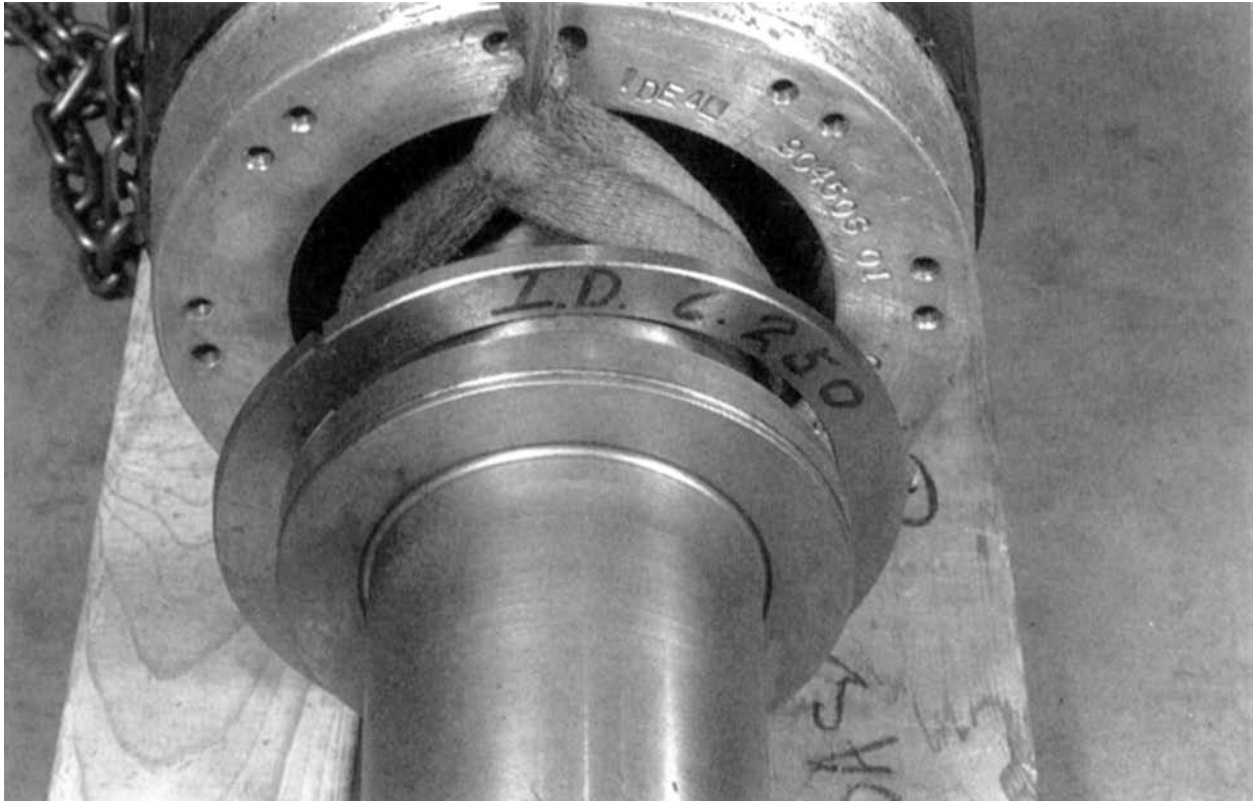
Inspecting the Bearing and Thrust Surfaces
